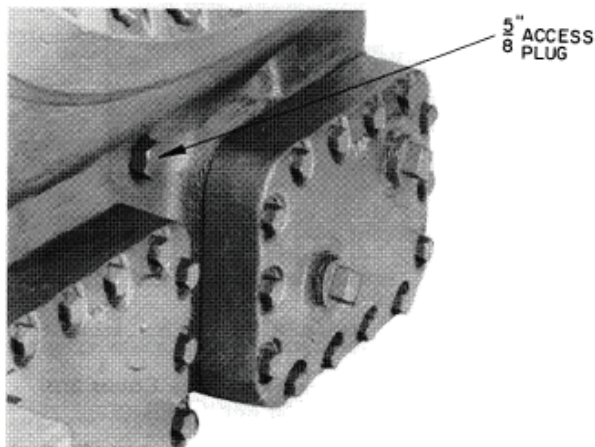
5H80-126 Center Main Bearing Housing Setscrew Location
